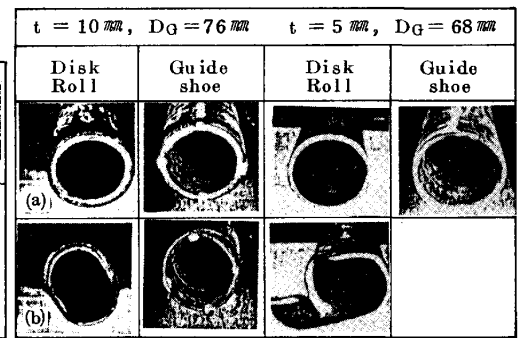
Shell End Shape ((a) Front End, (b) Tail End)
